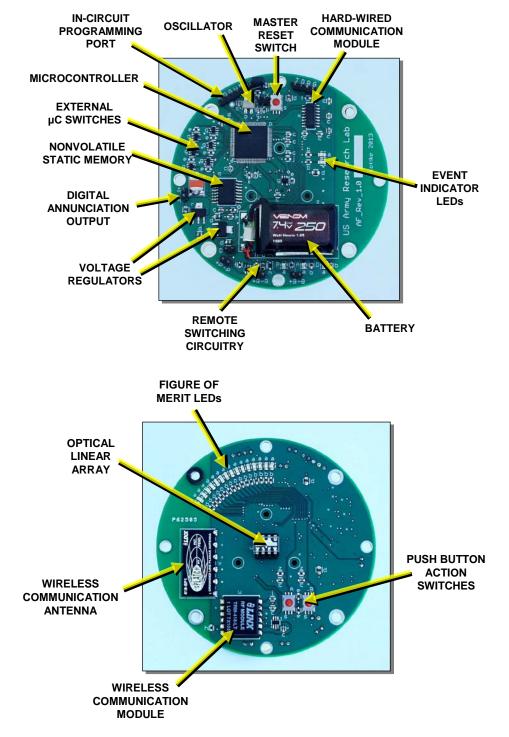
Top view (above) and bottom view (below) of completed hardware platform printed circuit board
